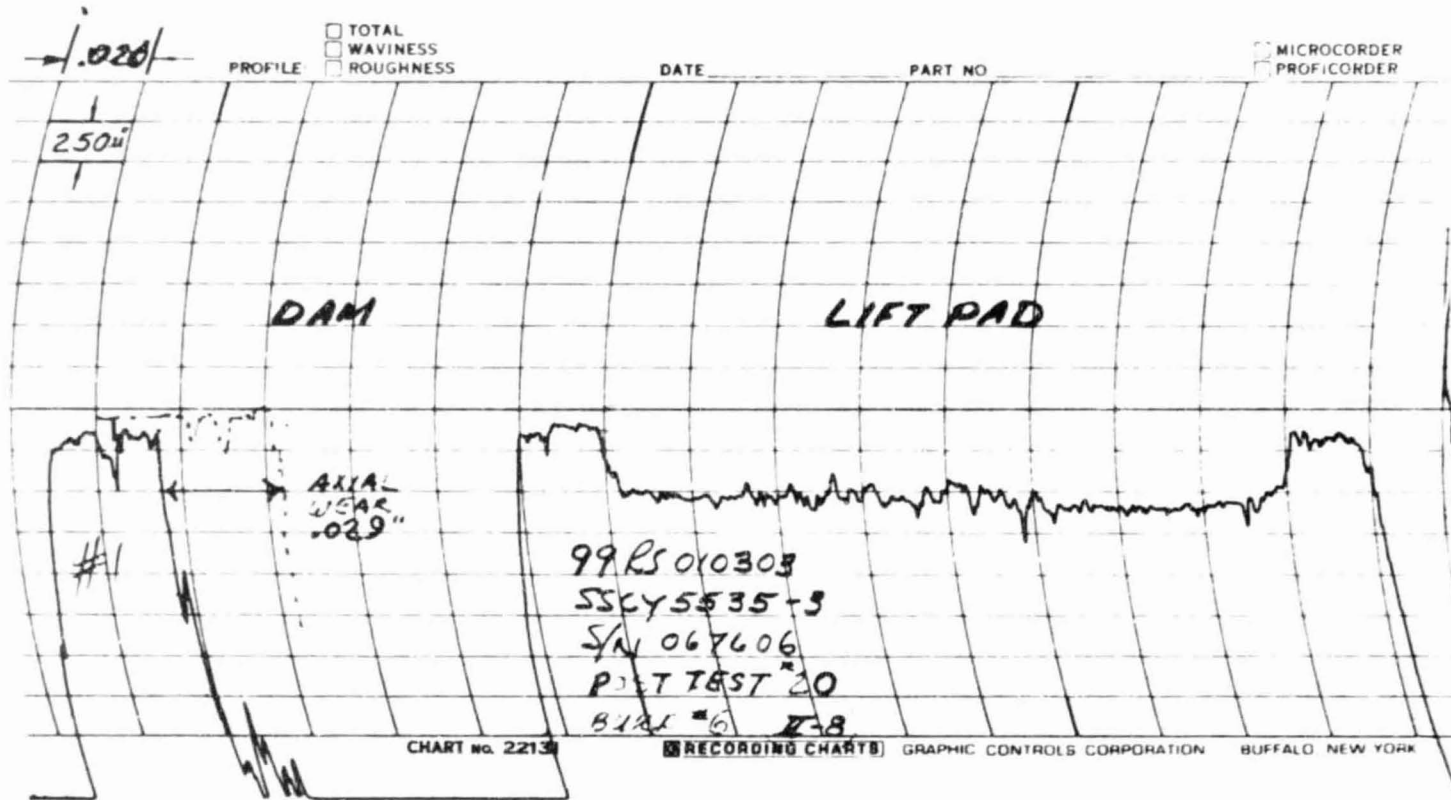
Surface Profile Trace Turbine End Primary Seal Lift Pad 1, P/N 99RS010303, S/N 06, Build 6, Posttest 20
